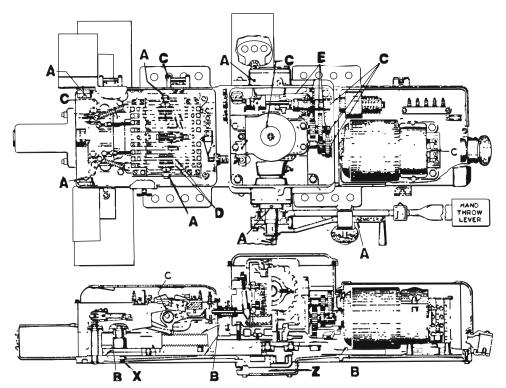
Lubrication Locations for M-23A and M-23B Switch Machines
